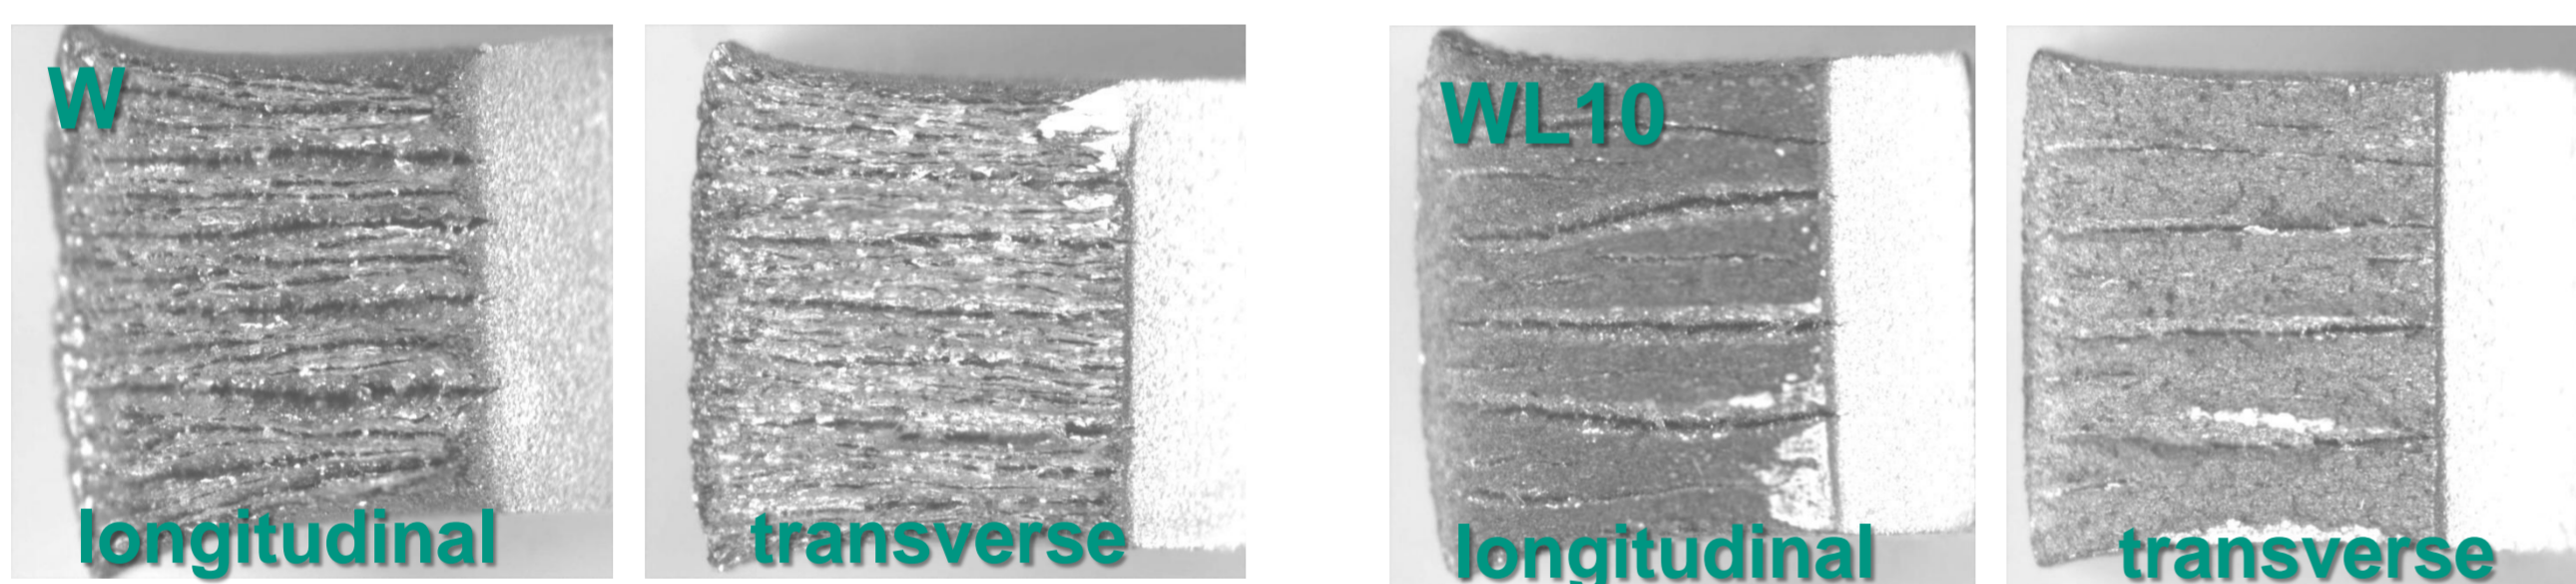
At 900 °C delaminated fracture surfaces of typical plate specimens.
